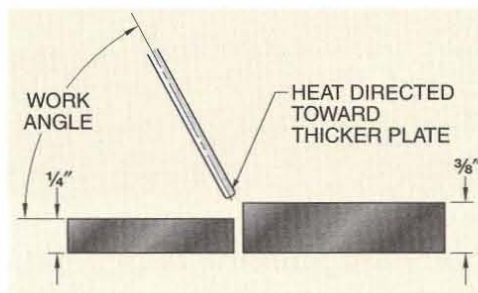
When welding base metals of different thicknesses, direct more heat to the thicker metal.
